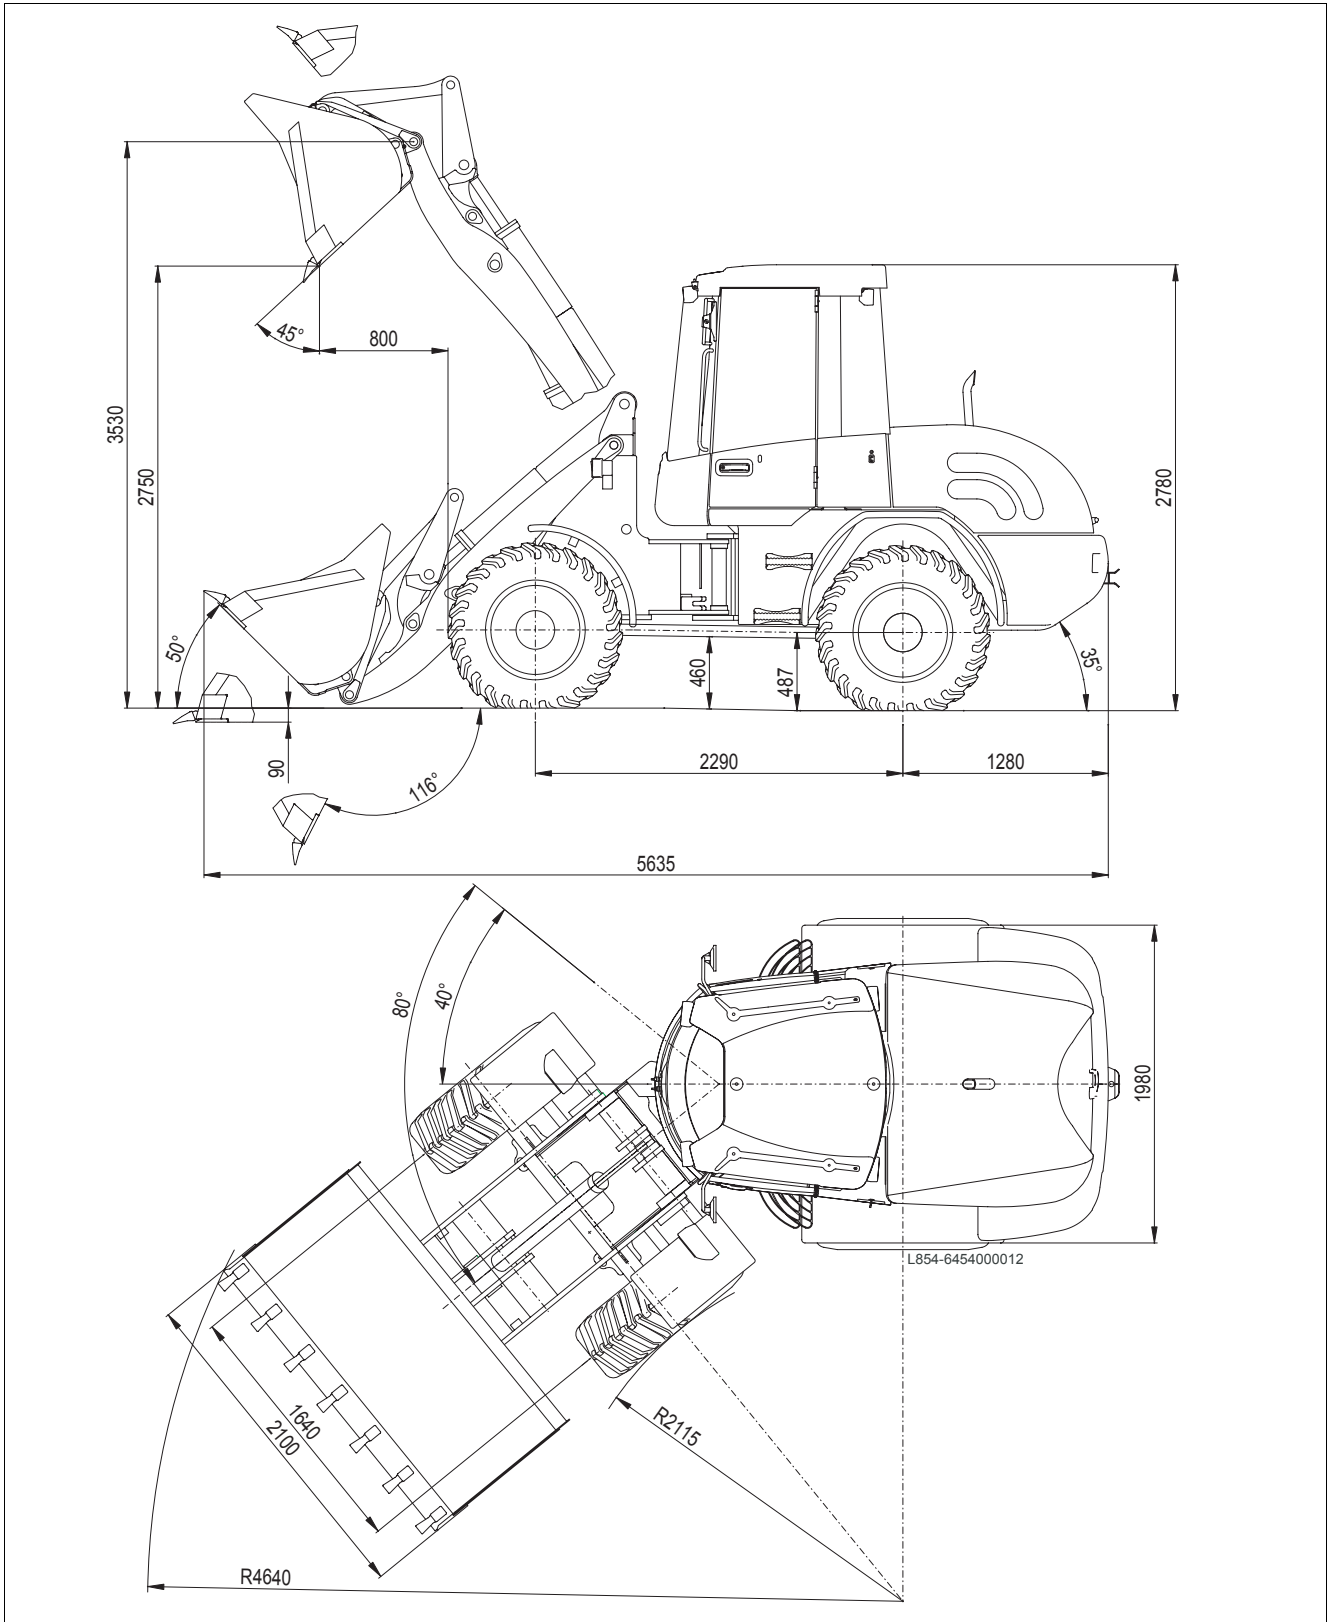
Dimensioned drawing with general-purpose bucket and 405/70 R 20 tires
